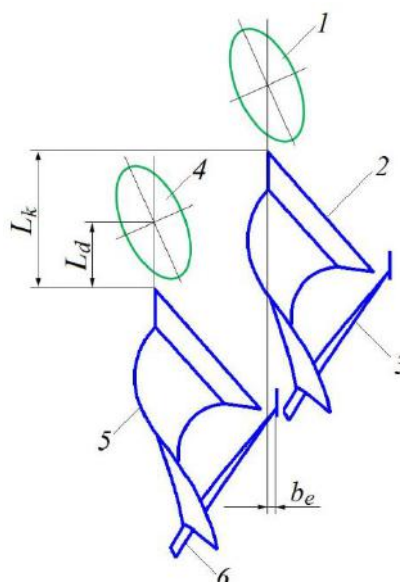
Scheme of interposition of the sprocket plug disc shape angle controller and housing
